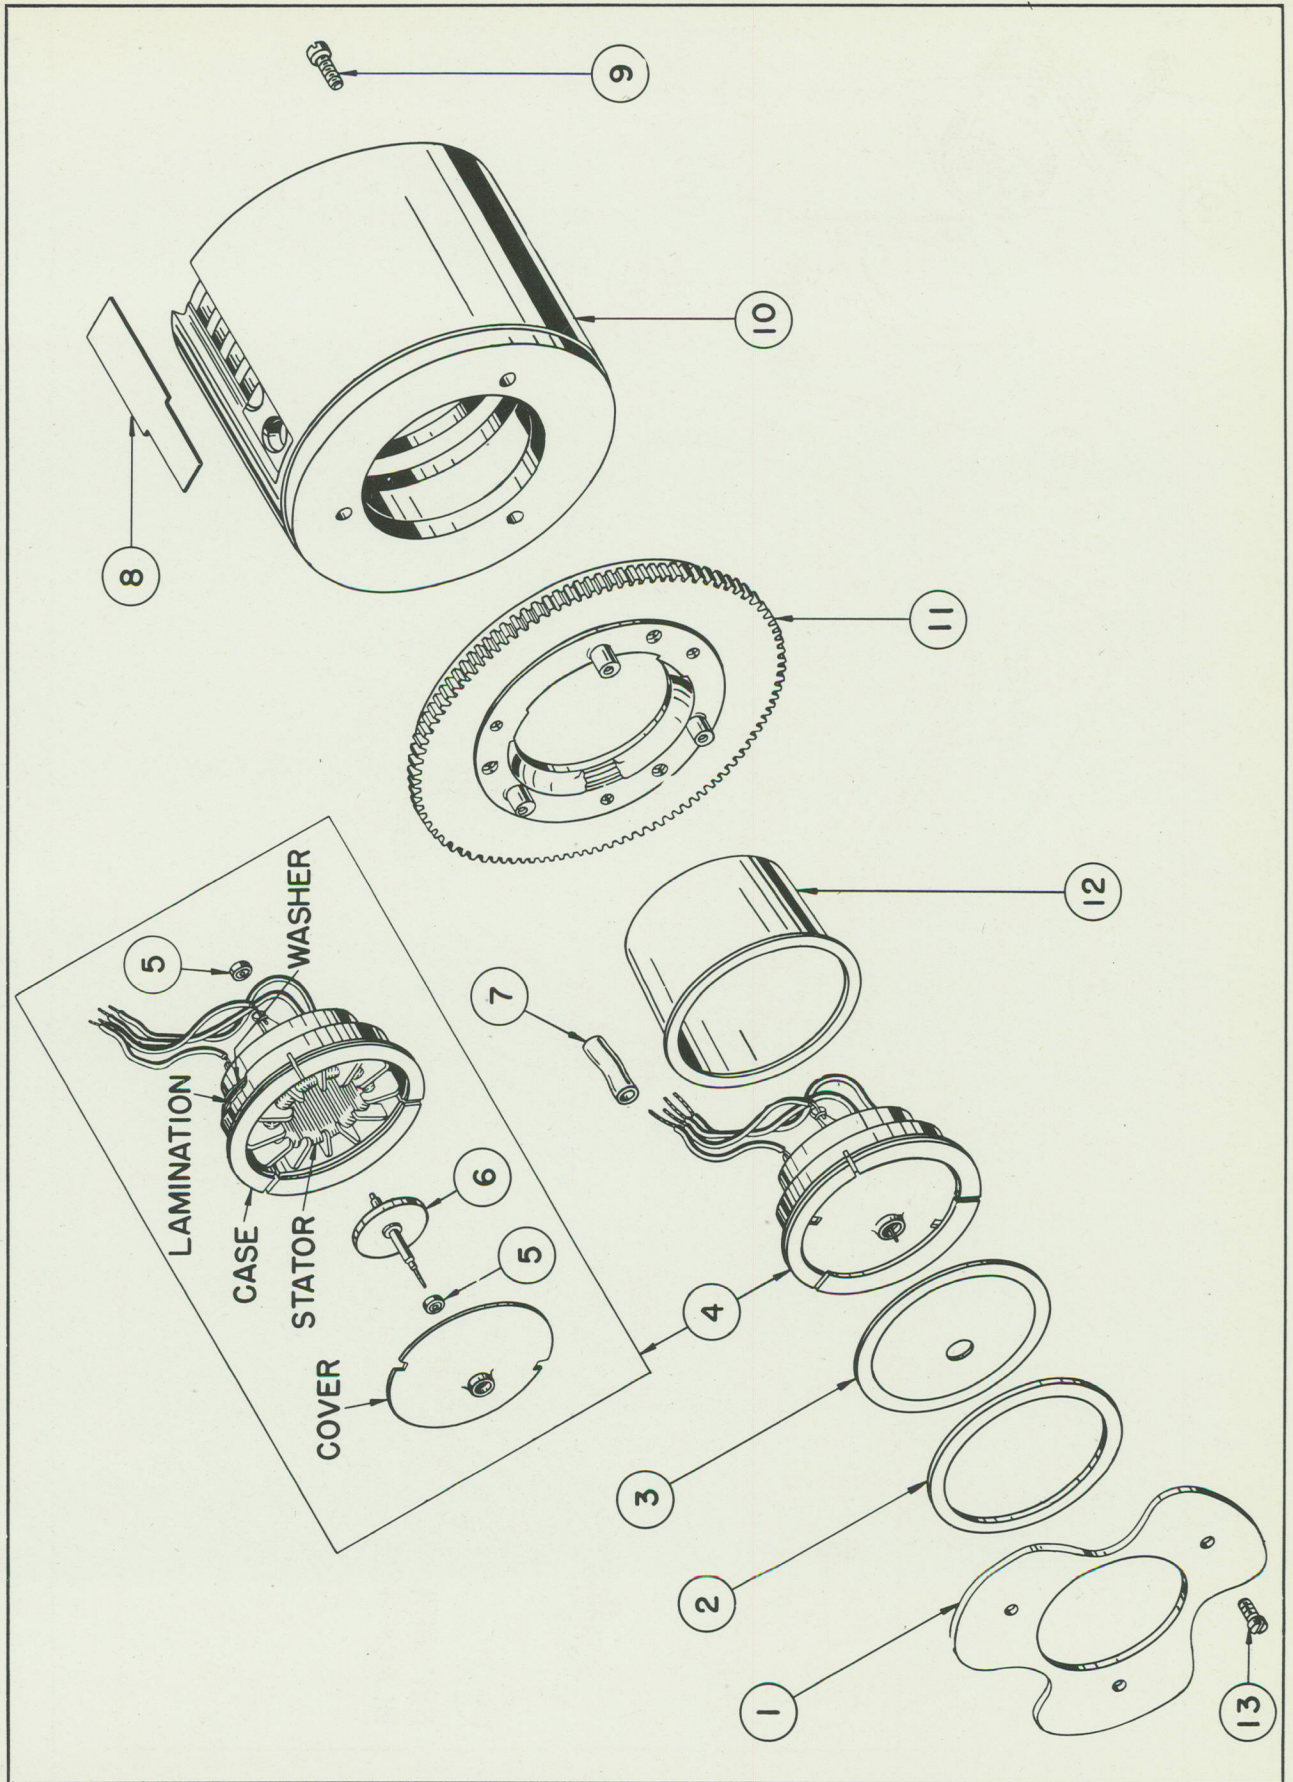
Exploded View—Stripped Assembly—Indicator—Type AN 5730-2A, Navy Stock No. R88-J-803 (Pioneer Type 10078-1T-A1)
